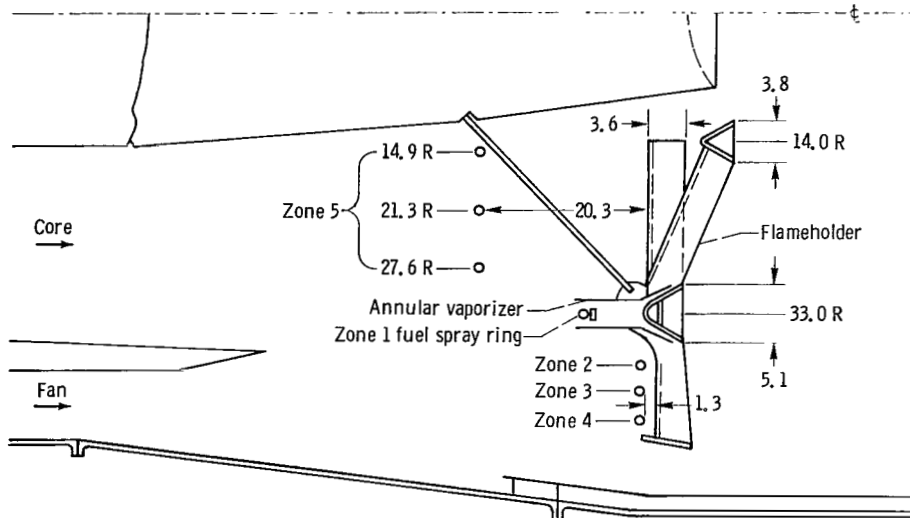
Carburetted flameholder II. Dimensions in centimeters.
